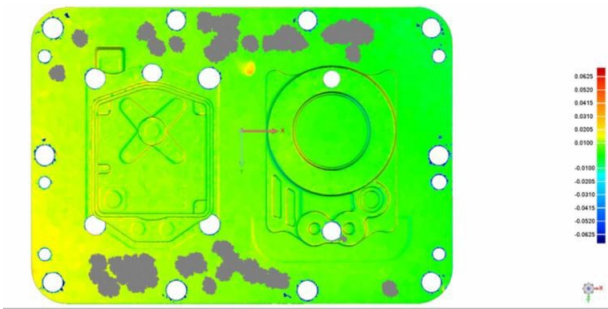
Upper aluminum mold with drainage and fill gun relief.
